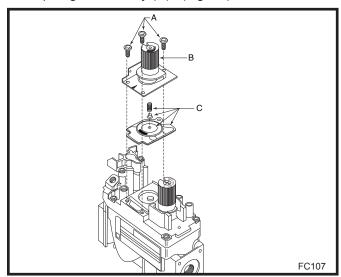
Remove mounting screws, pressure regulator tower and spring and diaphragm assembly.
